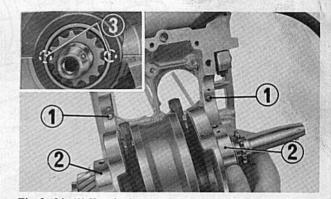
(1) Knock pin (2) Bearing (3) Aligning mark on bearing
